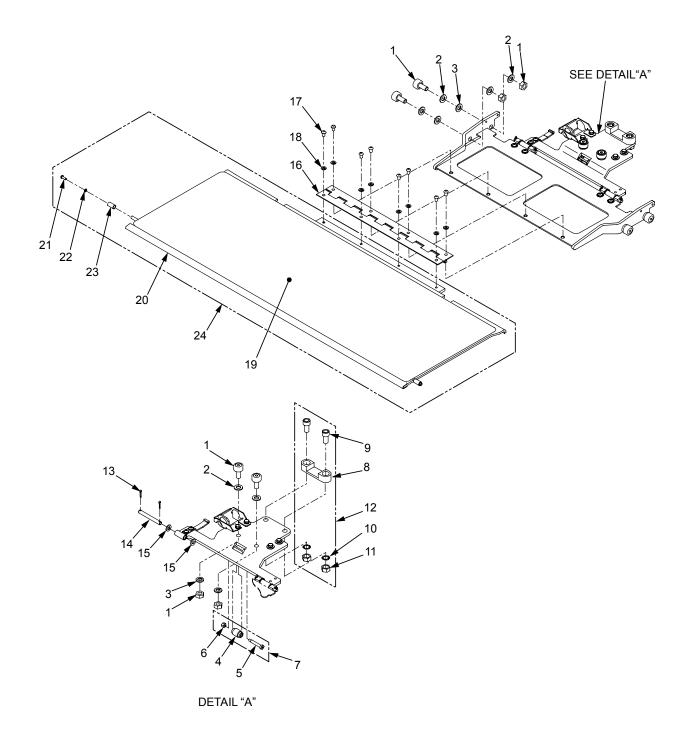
PF7000 SERIES RAMP TRAVELING FRAME ASSEMBLY
